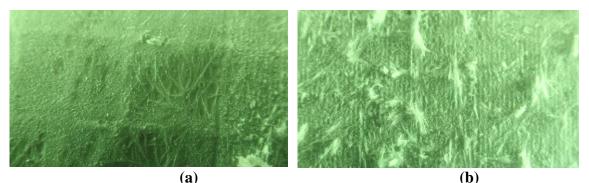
Composite material after cut using Carbide Tool (scale 5:2). (a) Flank Wear = 0.2 mm after 0.375 min. (b) Flank Wear = 0.52 mm after 2 min.
